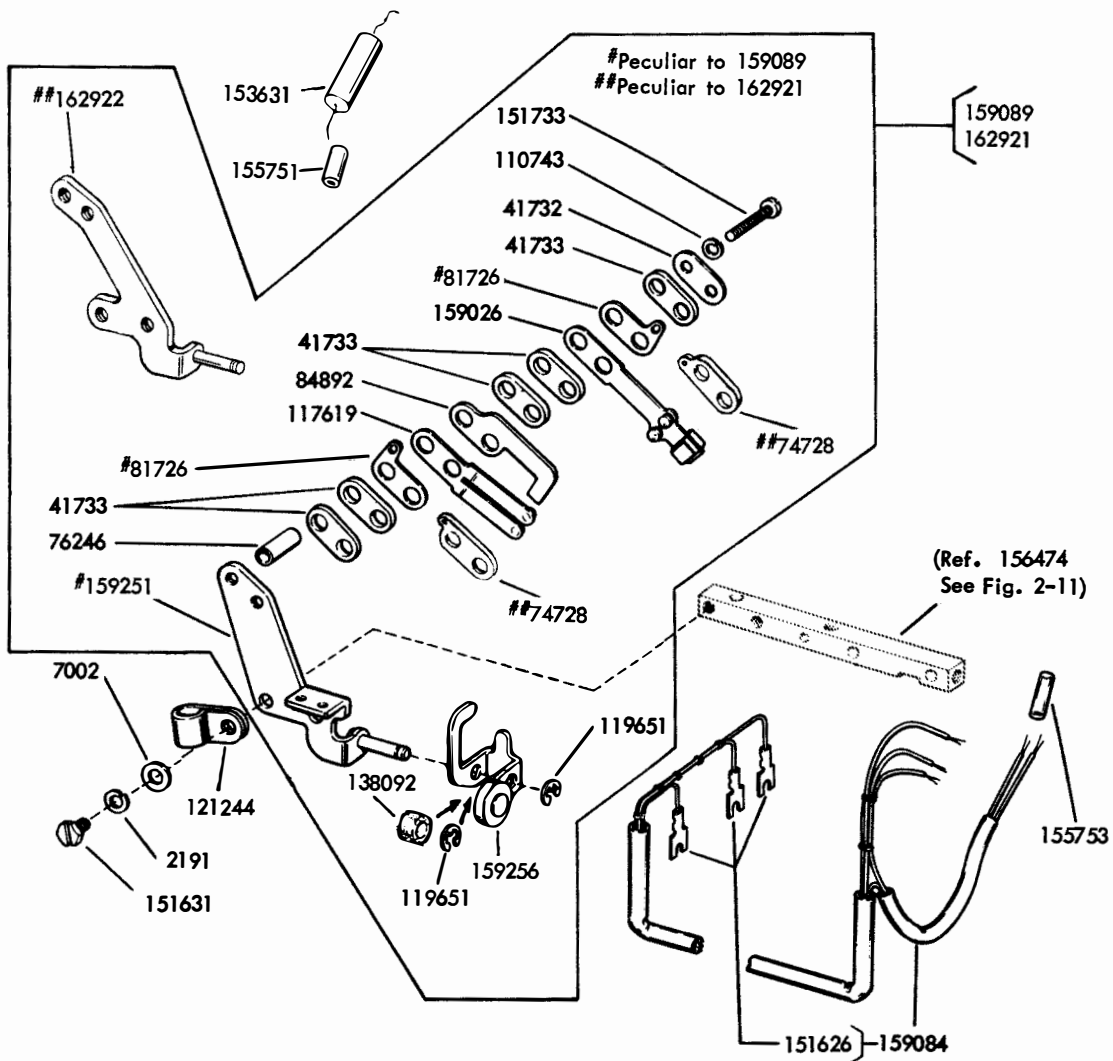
MAGNET RELEASE CONTACT ASSEMBLY
